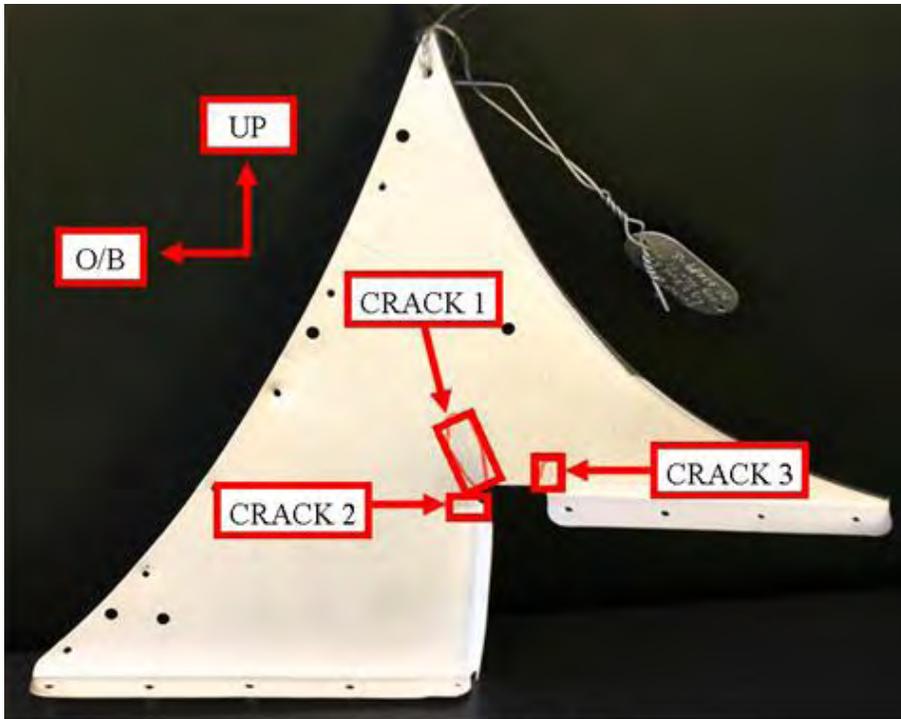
Macroscopic View of Crack 1 on the Right Wing Bulkhead Wing Fillet WS 30 FS 181
